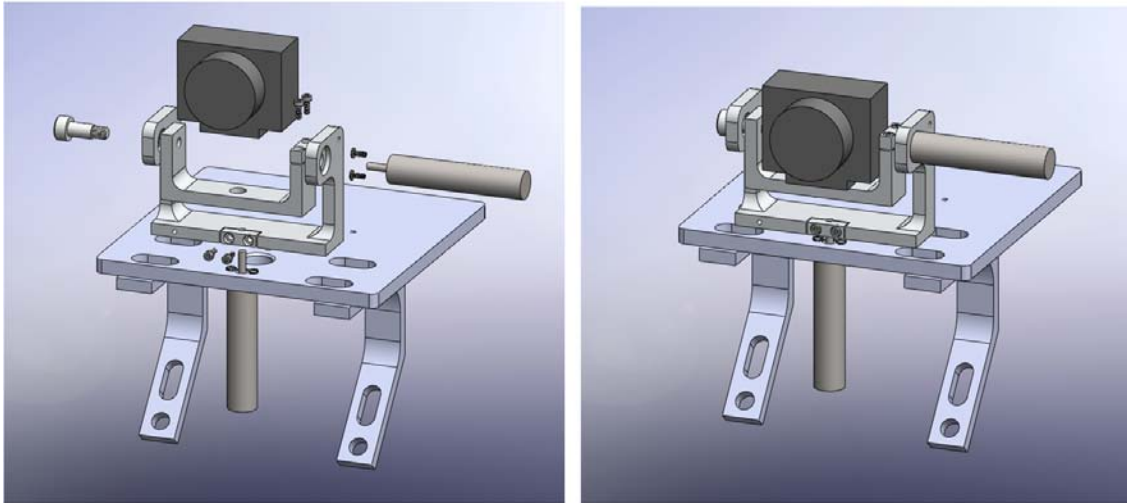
Exploded and unexploded views of assembly showing shaft connections
